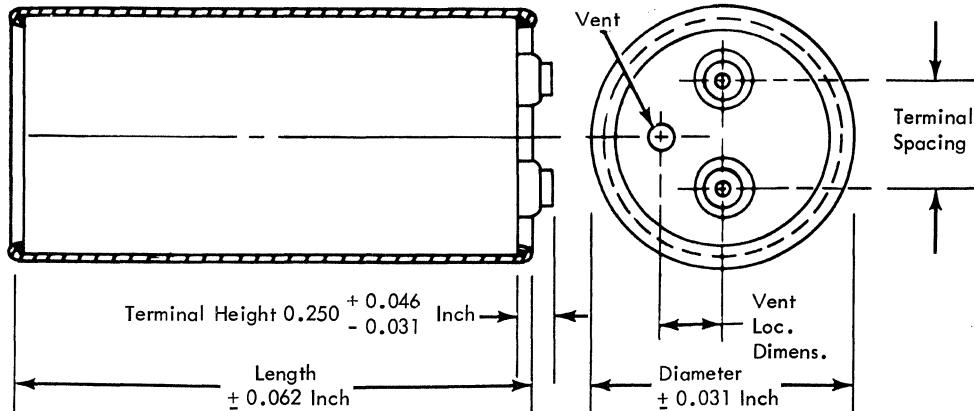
Typical Can Type Capacitor Physical Dimensions
